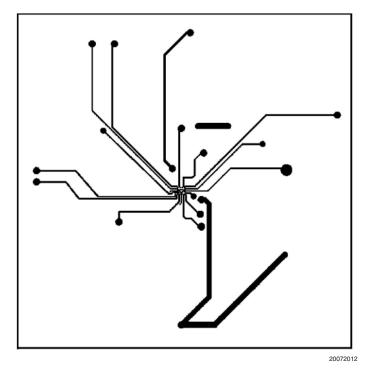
LM4930ITL Demo Board Inner Layer 1
